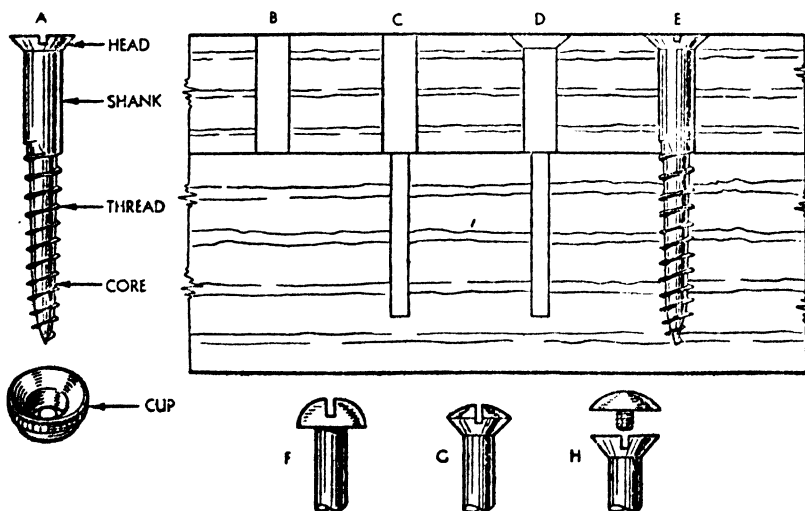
Wood screws. A. Flat-headed screw; B. hole bored for screw shank; C. hole bored for screw core, in hardwood and for long screws; D. countersunk for head; E. screw inserted; F. round-headed screw; G. raised head; H. countersunk screw with screw cap. These screws are obtainable in various metals and sizes.
